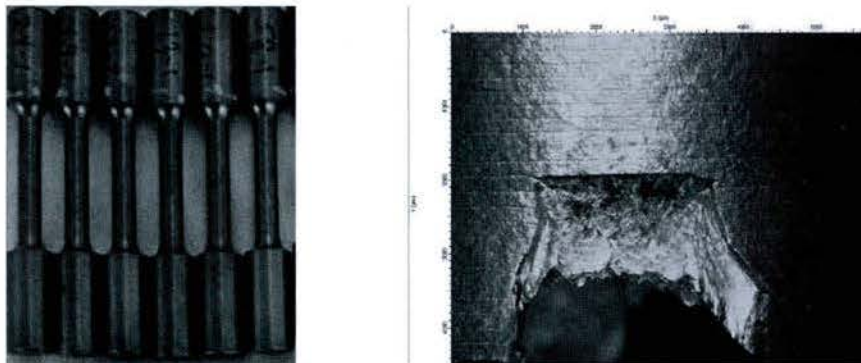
Ultimate Tensile Specimens a) After Heat Treatment b) After fracture
